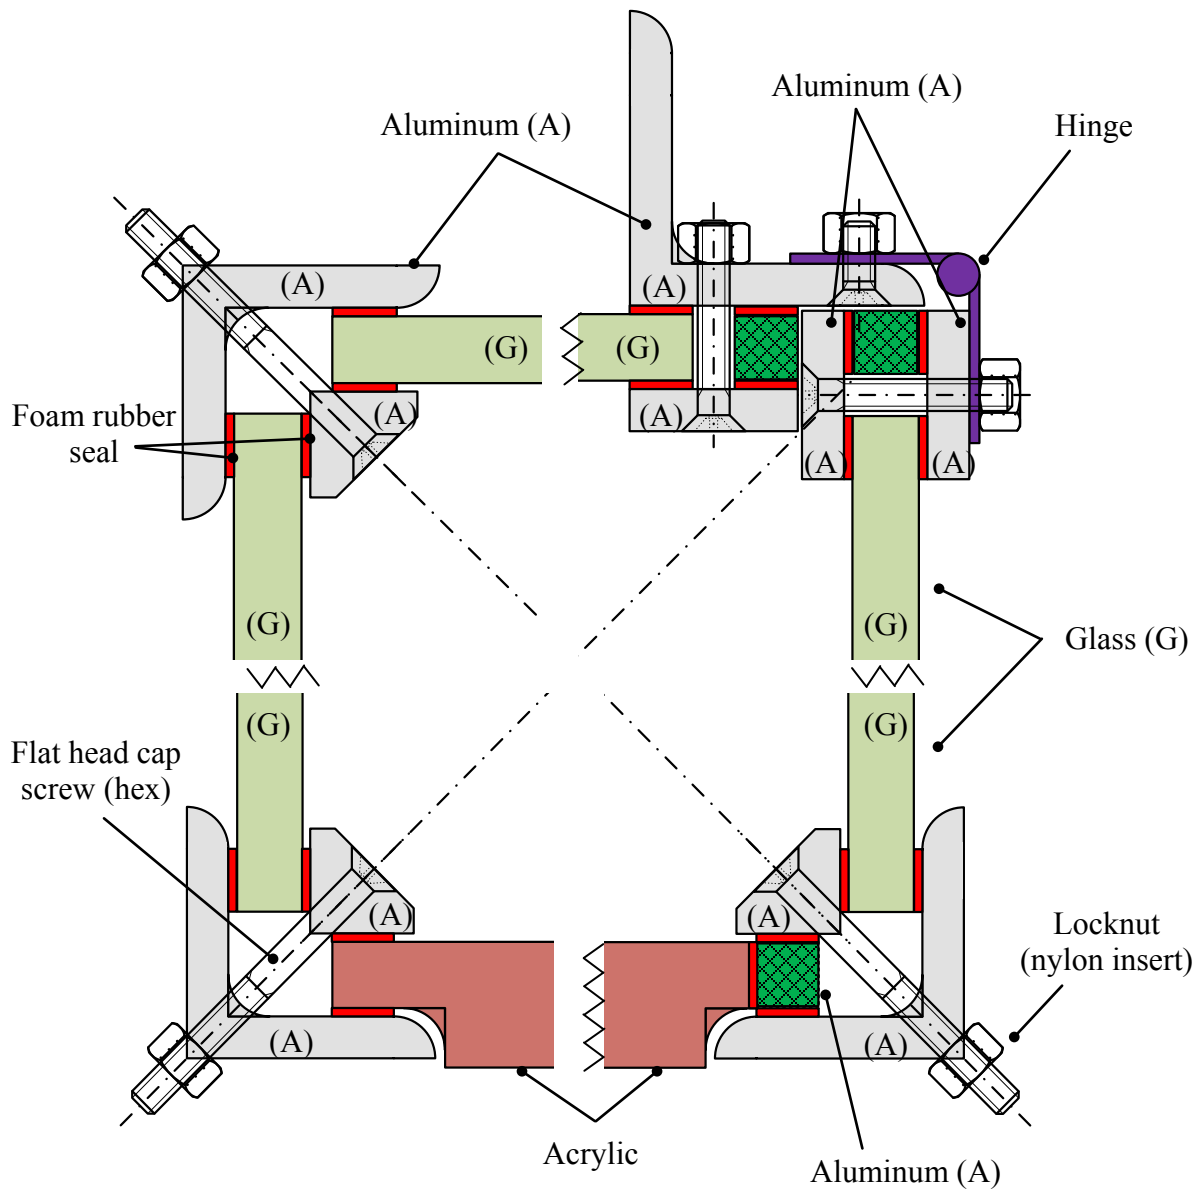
A schematic (drawn to scale – not actual size) showing a cross-section view of the final design of the test section assembly. The zigzag lines represent segments of the sides, top, and bottom of the test section that were removed from the schematic in order to show greater detail in each of the four corners.
